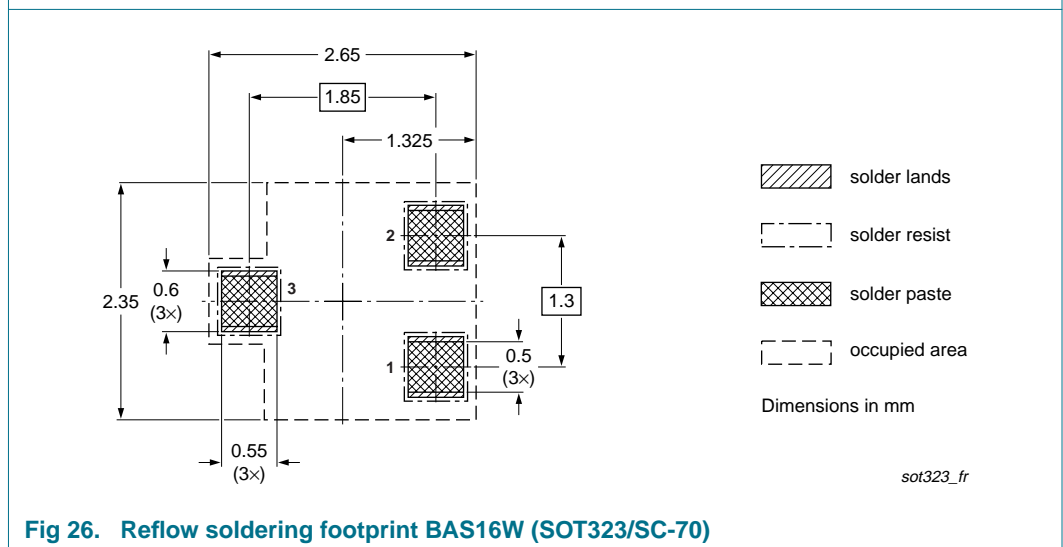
Reflow soldering footprint BAS16W (SOT323/SC-70)
